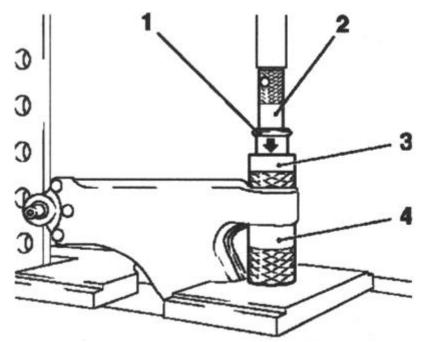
Mounting front dem-pfiruyuschey Bushings: 1 - damping sleeve, 2, 3, 4 - a special tool
